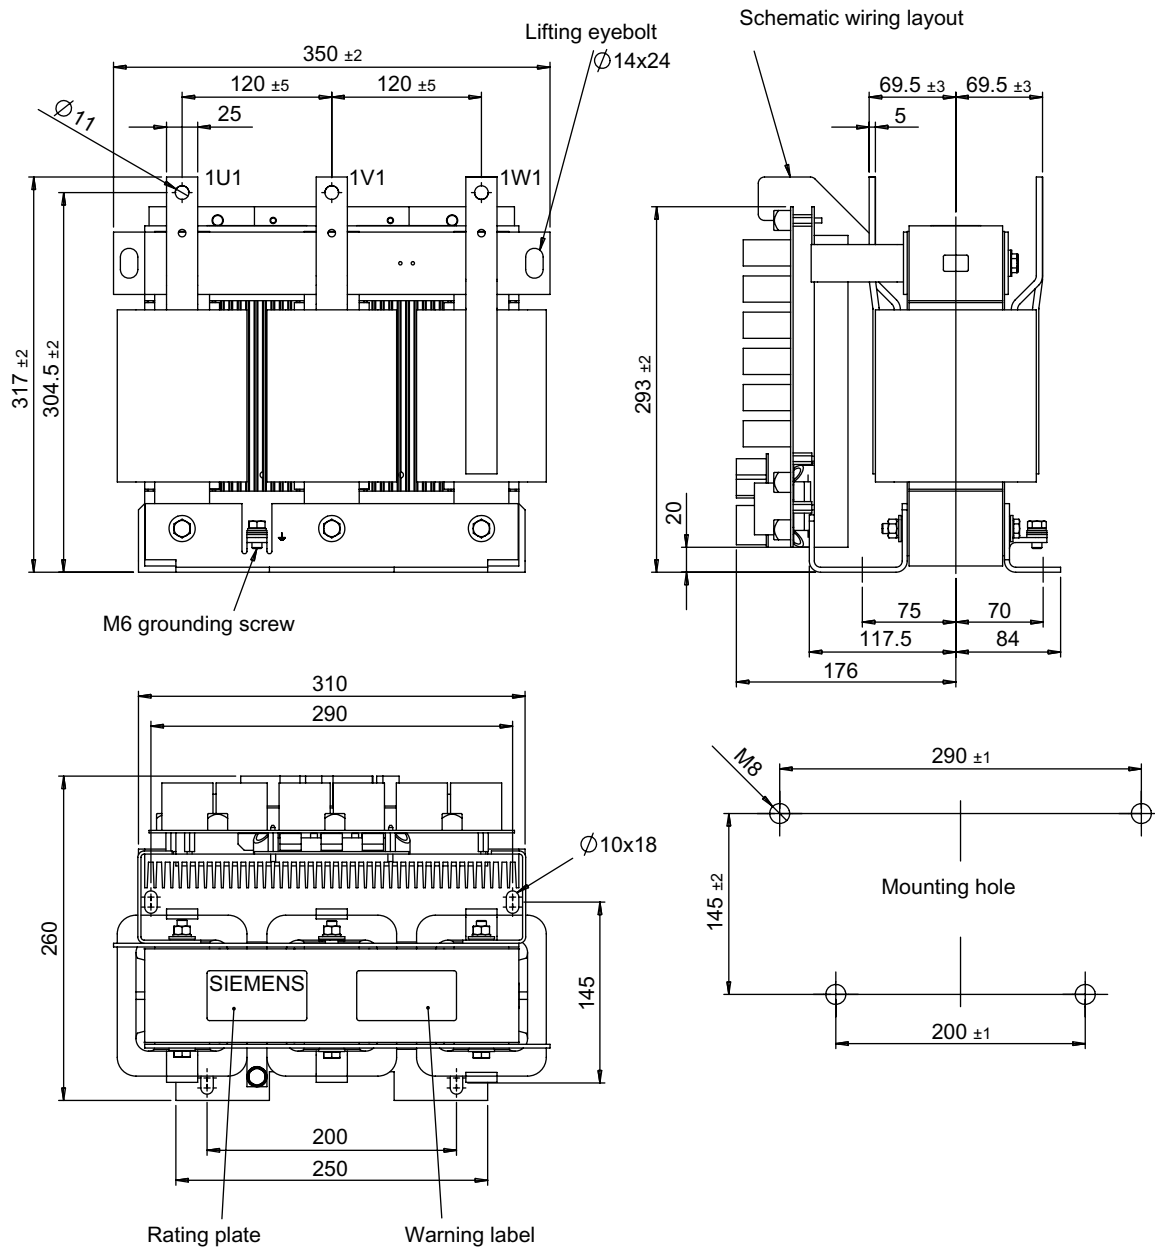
Dimension drawing for dV/dt filter compact plus voltage peak limiter, type 2
